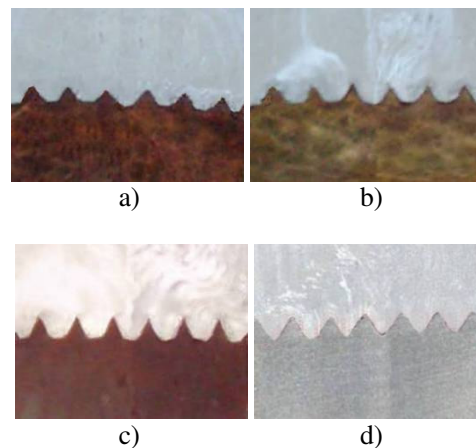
Direct welded joints on cogged surfaces: a) Al-Cu; b) Al-brass; c) Al-steel; d) Al-stainless steel
